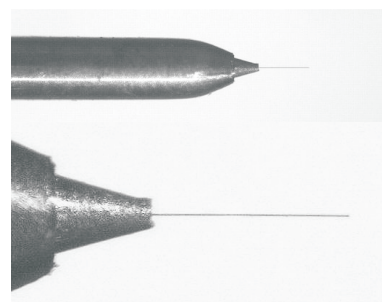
Properly fabricated tool electrode with carbon fibre length  $\sim 0.7$  mm.
